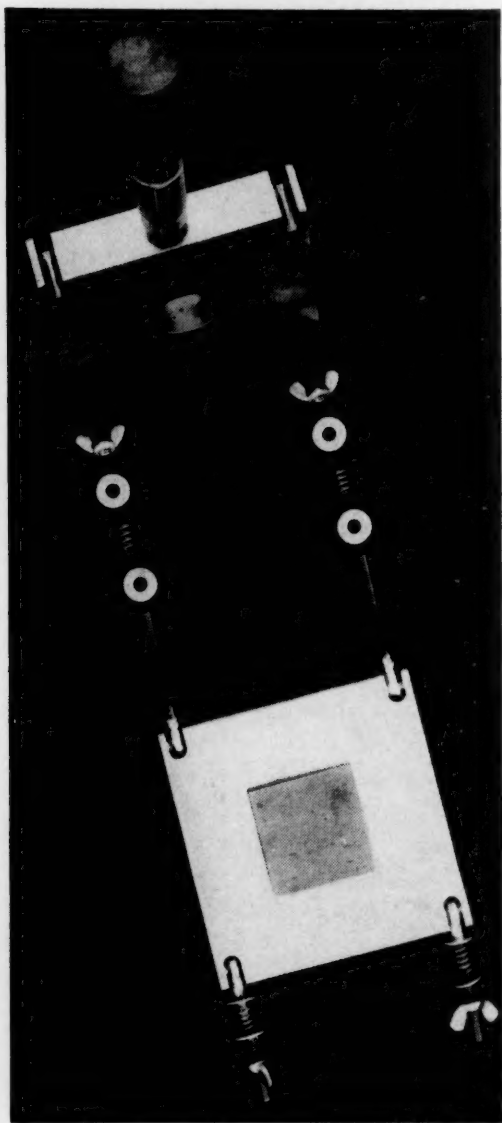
HINGED COPPER WELDING JIG FOR MAKING CRACK-SENSITIVITY TEST.
